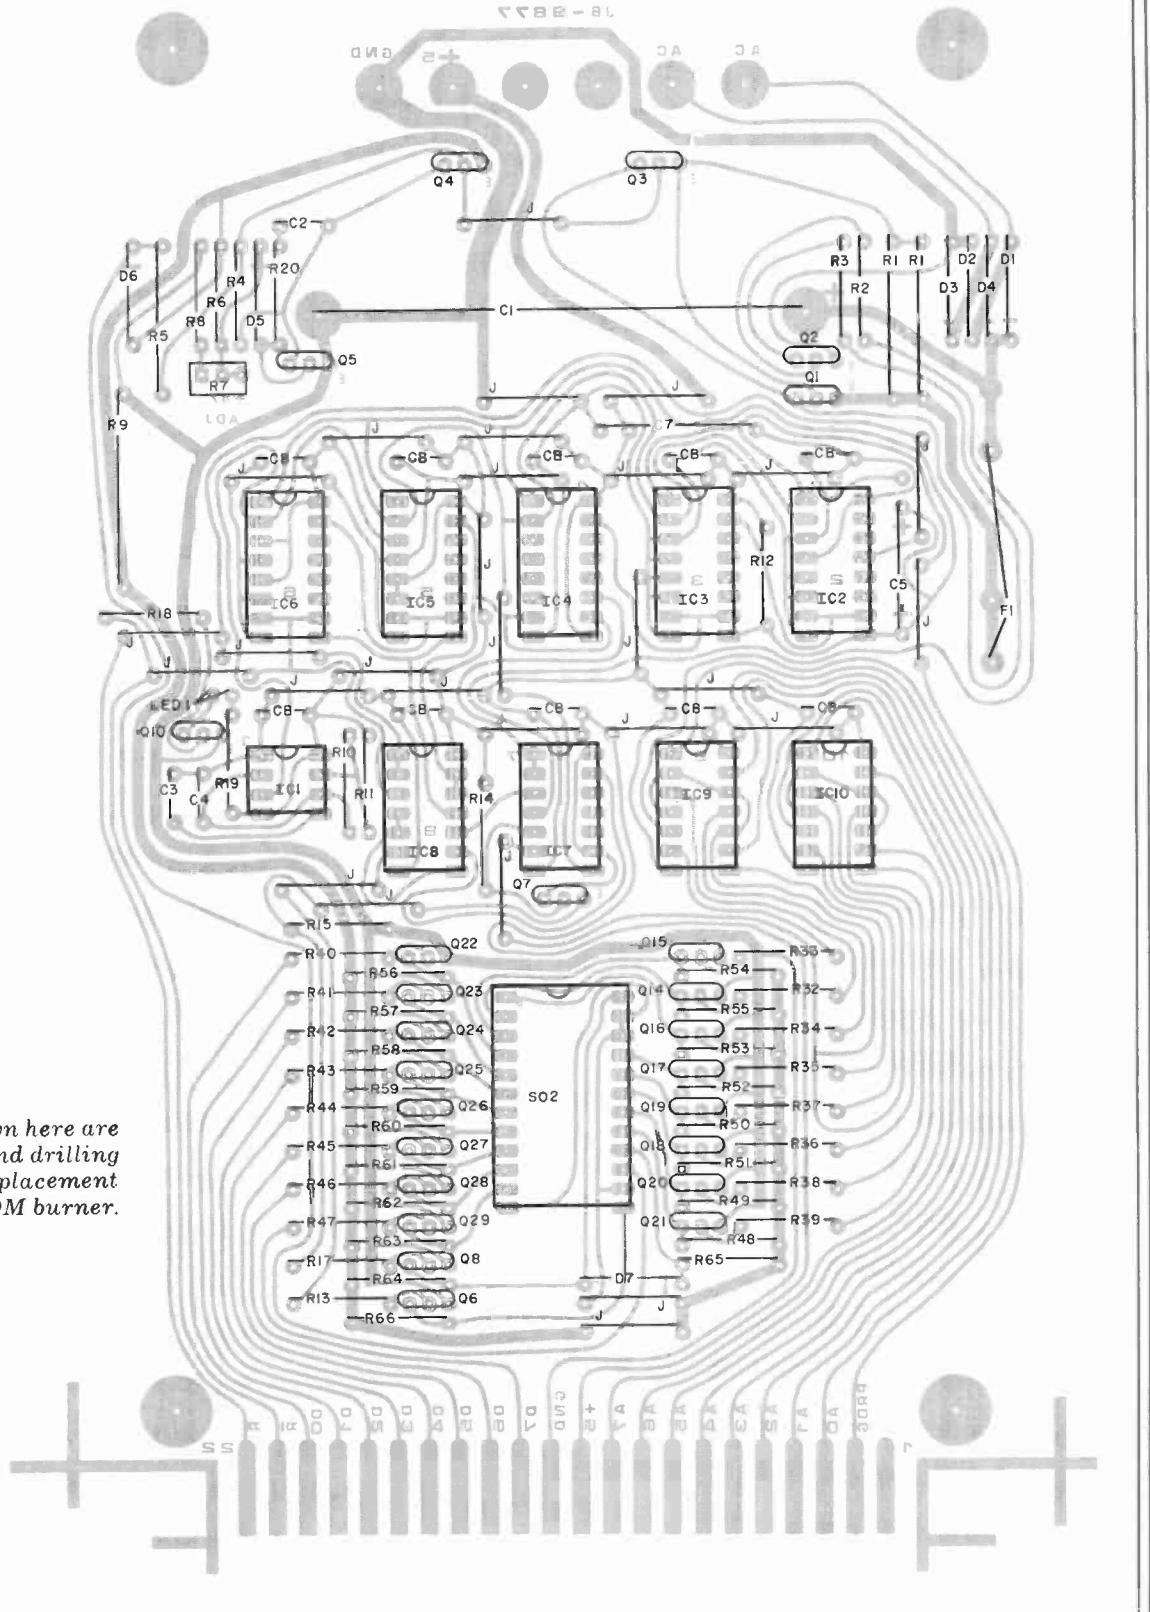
Shown here are etching and drilling and component placement guides for PROM burner.
